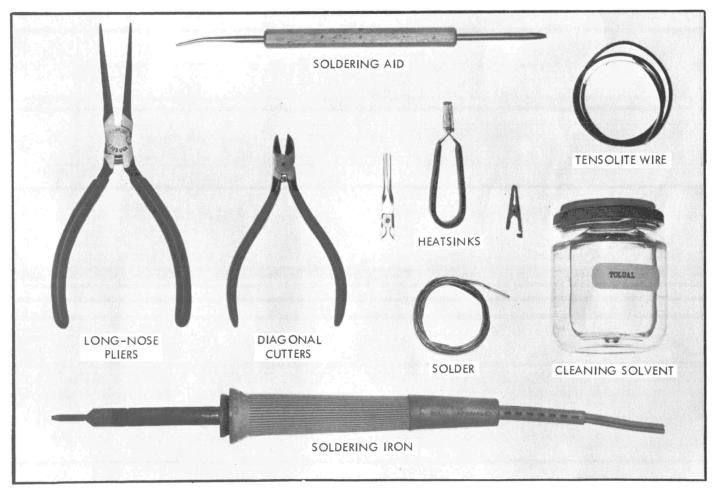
TOOLS REQUIRED FOR SOLDERING
